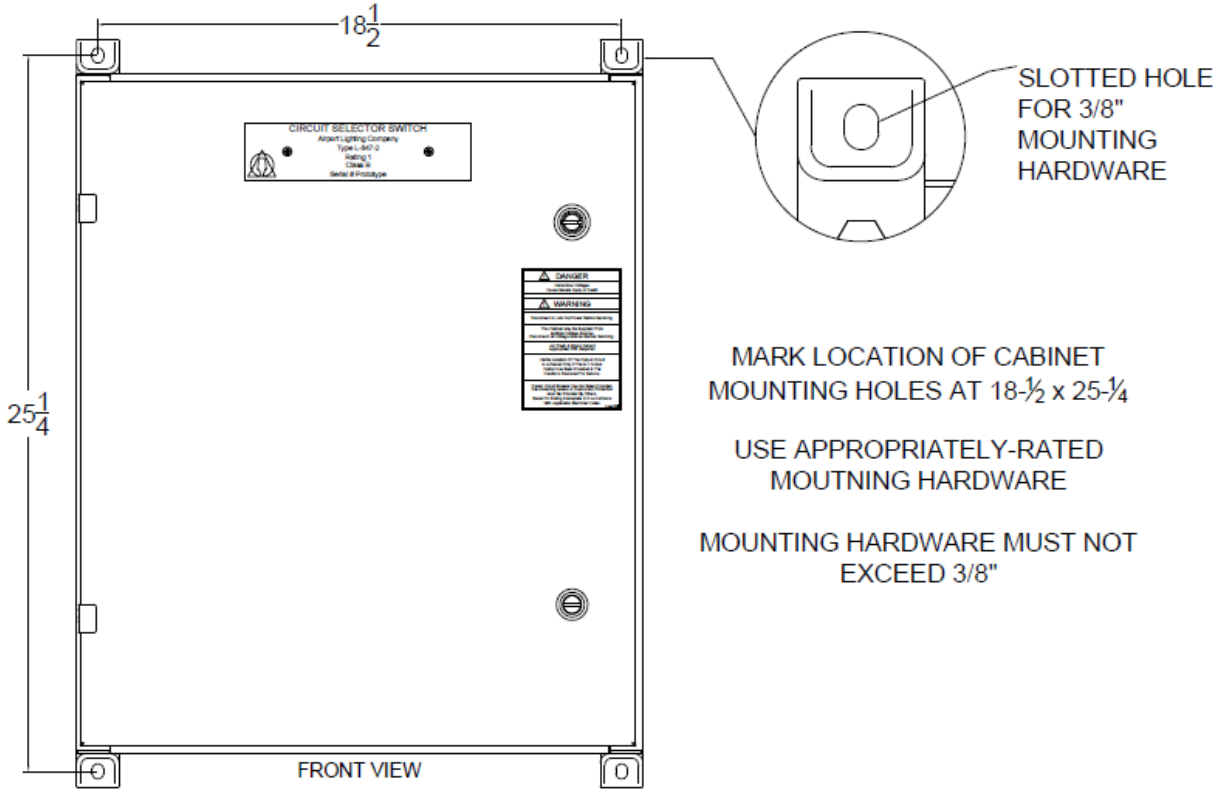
847-1,2-x-x-xxx Mounting Dimensions
